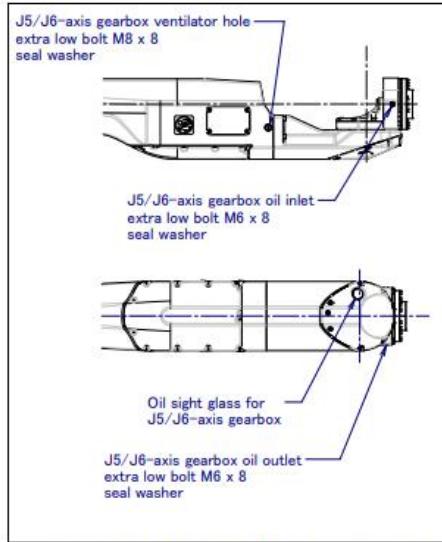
(a) Oiling point of J5/J6-axis gearbox
